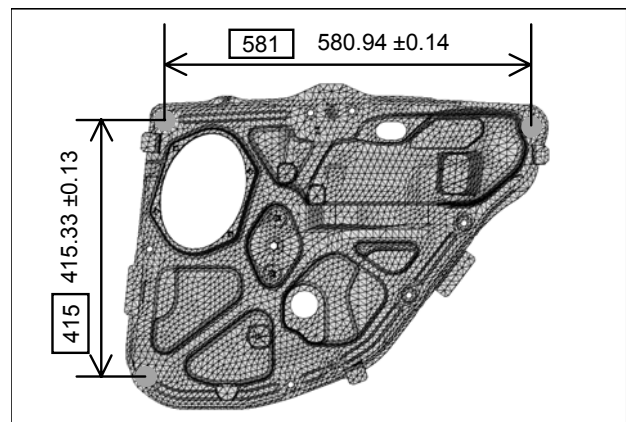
, Measured dimensions on aft door panel, many moulding conditions, ranging from zero holding to 12 seconds, 45 bar oil, 35 panels measured. CAD-dimensions shown in rectangles, measured dimensions showing max/min range.
